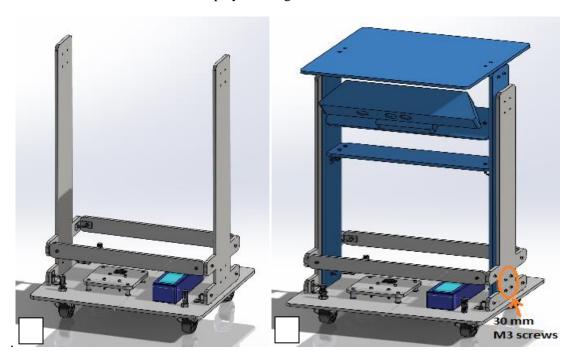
The Upper assembly slides into the Lower assembly and they are fastened together using the 30 mm M3 Screws (marked by the orange ellipse), near the base of the Part 3 pieces.
